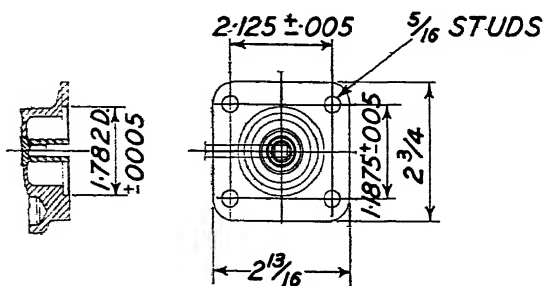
DETAILS OF FUEL PUMP ADAPTER
